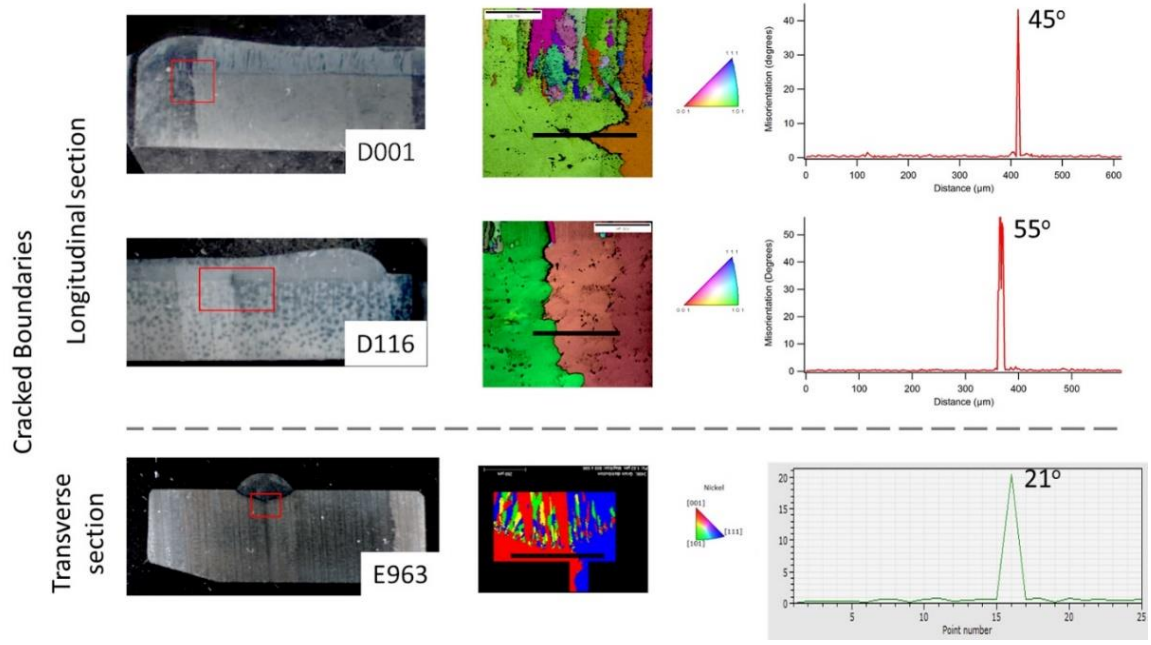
EBSD images of cracked DS CM247LC welds
